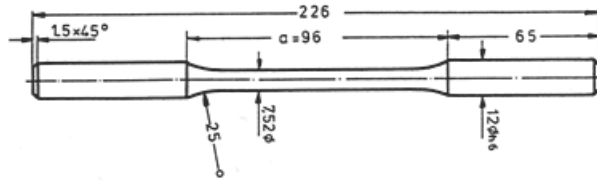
The geometry of the rotating bending fatigue test bar. All dimensions are in millimetres.
